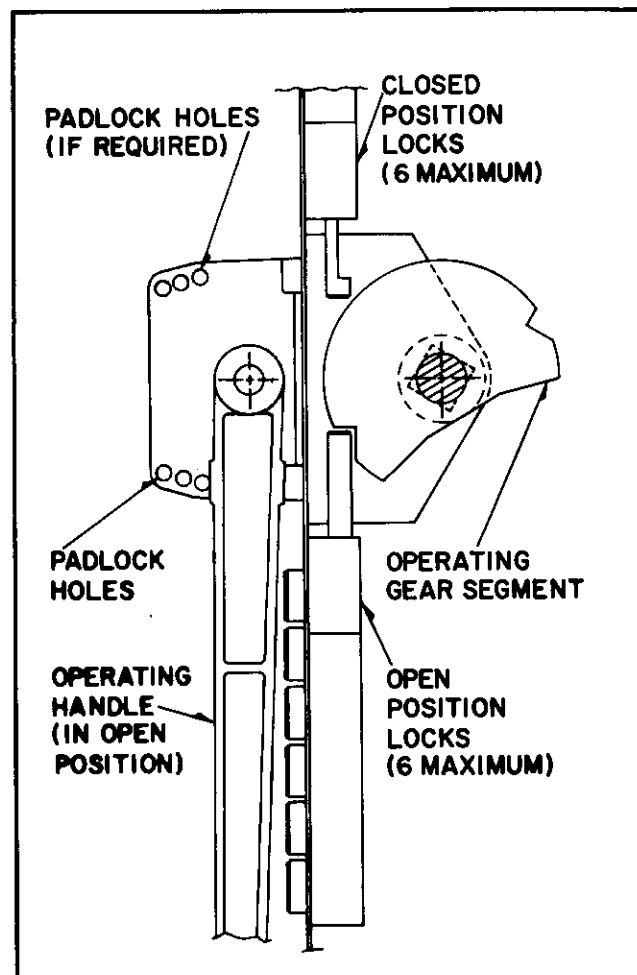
Position Of Kirk Key Locks (Dwg. 3497C99)
